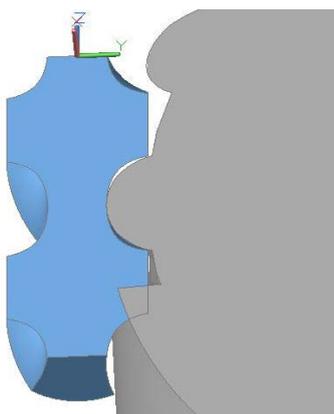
Visualization of the contact of surfaces of the detail and the tool in the axial section of the tool.
